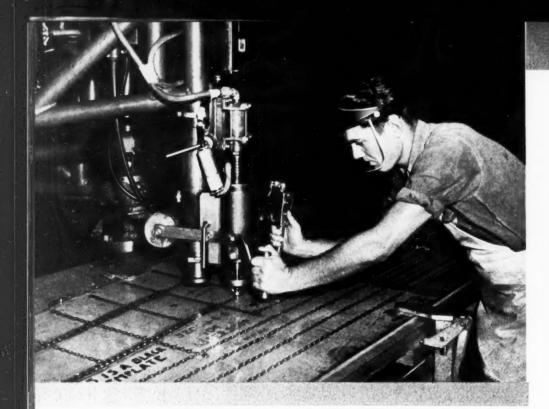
Drilling of the Thousands of Holes in Aluminum Alloy Sheets has been Speeded up by the Use of This Automatic Drilling Unit
